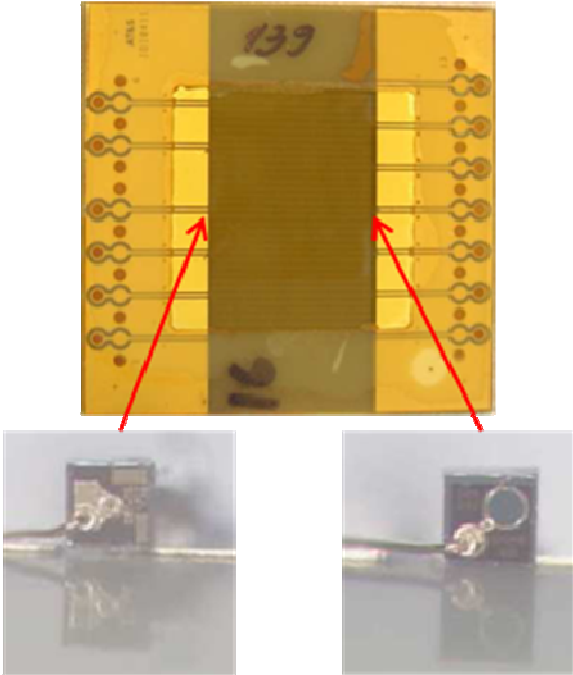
Printed circuit board with optical components. Mounted on the left side is
